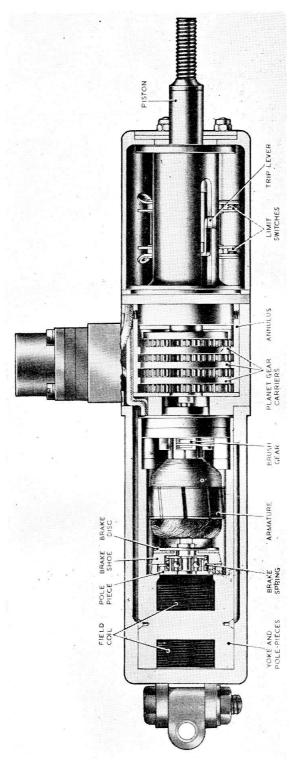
Fig. I. Sectional view of actuator, Type EJ50, Mk. 26
